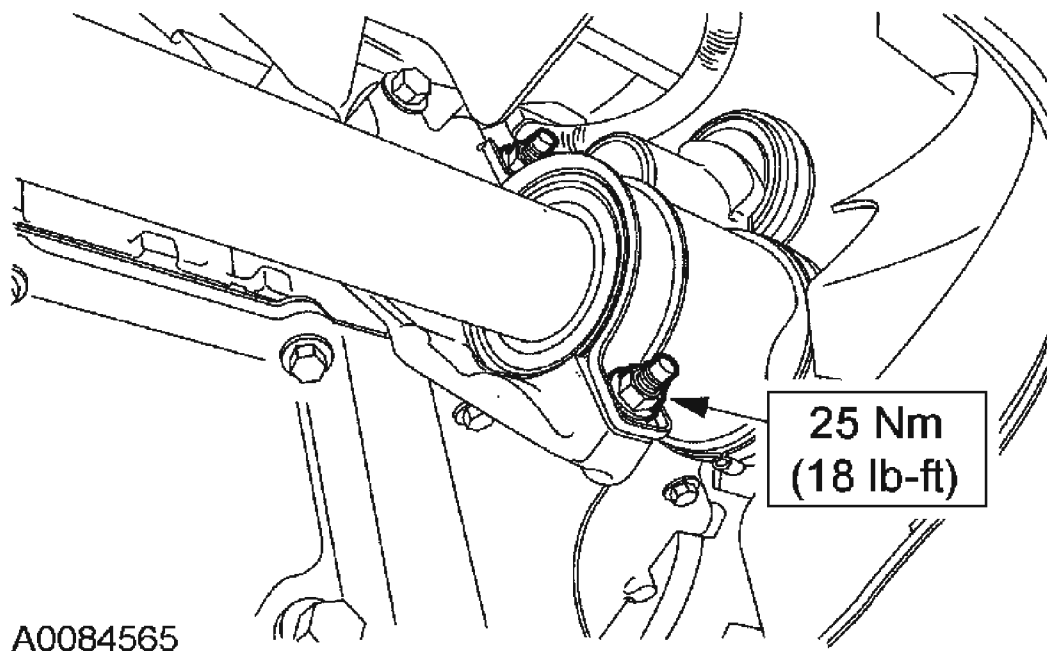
Installing Front Drive Intermediate Shaft Bearing Mounting Bracket
